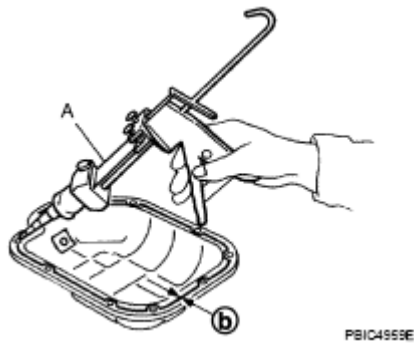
Applying Bead Of Liquid Gasket With Tube Presser
